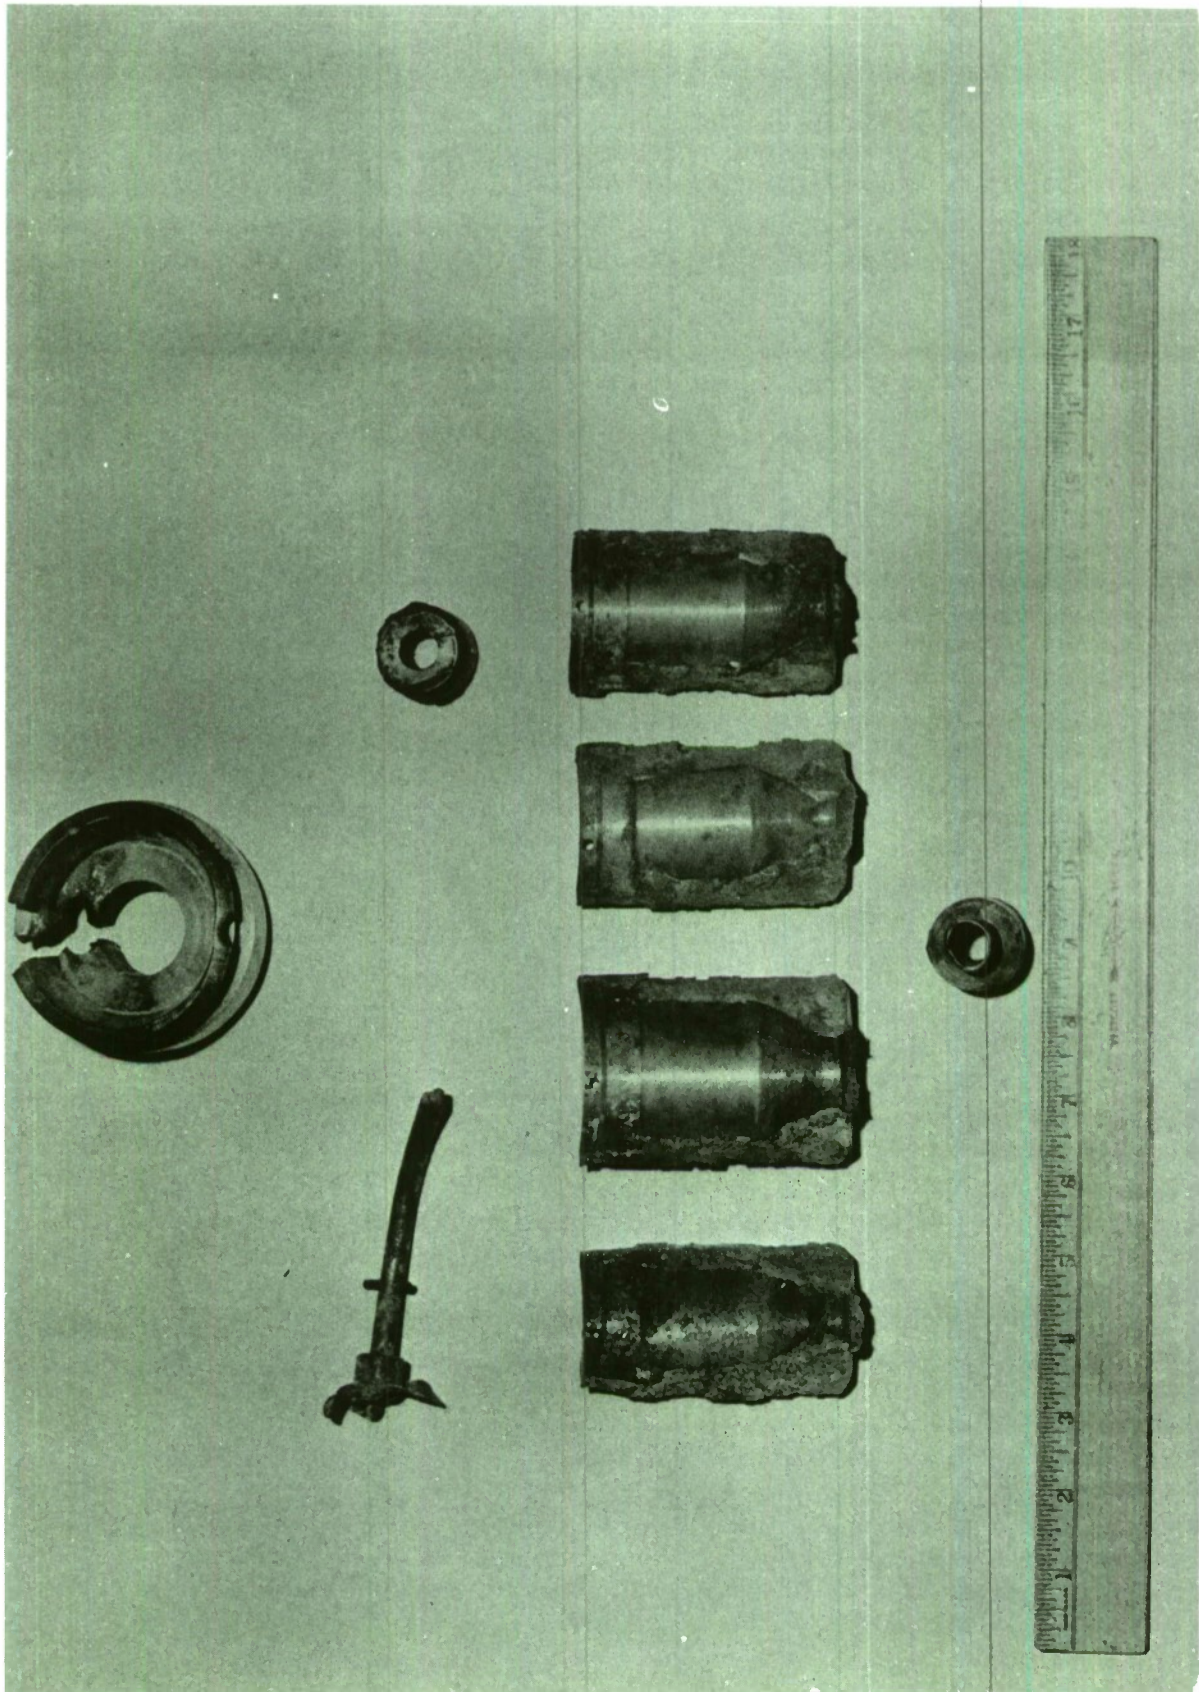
Pieces of in-line mixer body recovered after the explosion.
